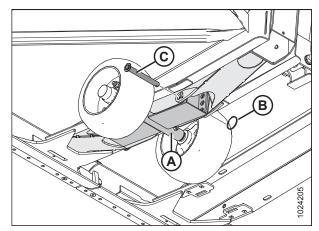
Inboard Wheel Assembly and Left Header Leg – View from Below, Right Opposite
